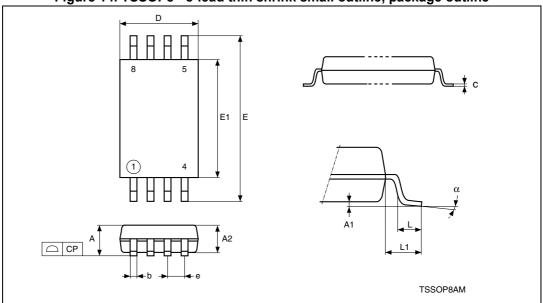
TSSOP8 - 8-lead thin shrink small outline, package outline
